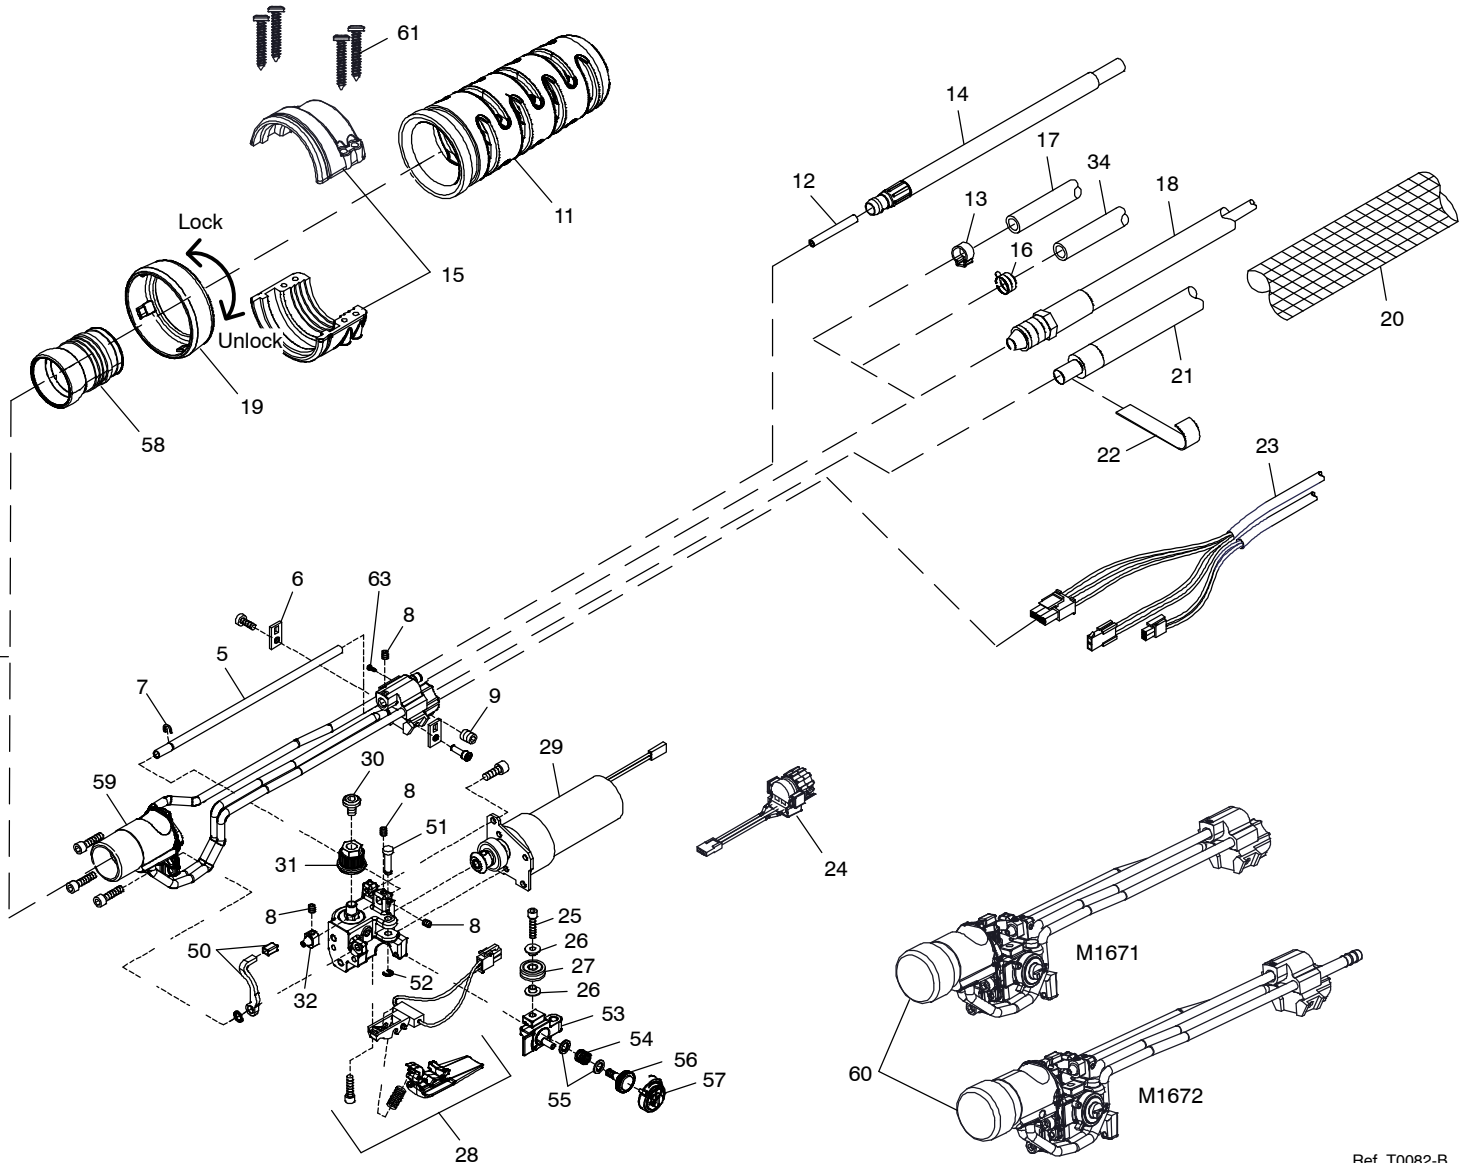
Exploded View Of XR-Aluma-Pro Gun
